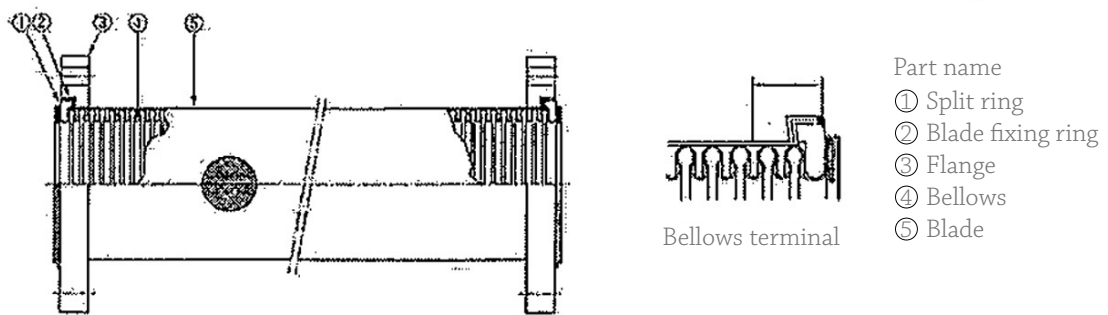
Flanged end type: F4 bellows terminal non-weld structure (nominal diameter: 20 – 300)¹⁰
